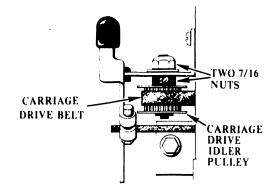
HEAD ADJUSTMENT ARM ASSEMBLY
